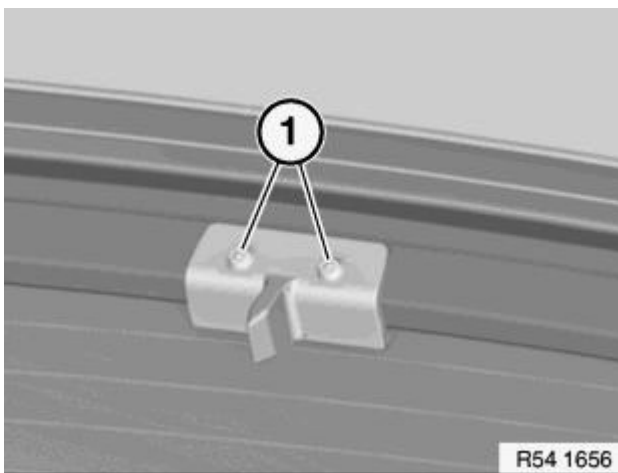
Ensure Fin Fits Into Provided Recess When Roof Shell Is Lowered
